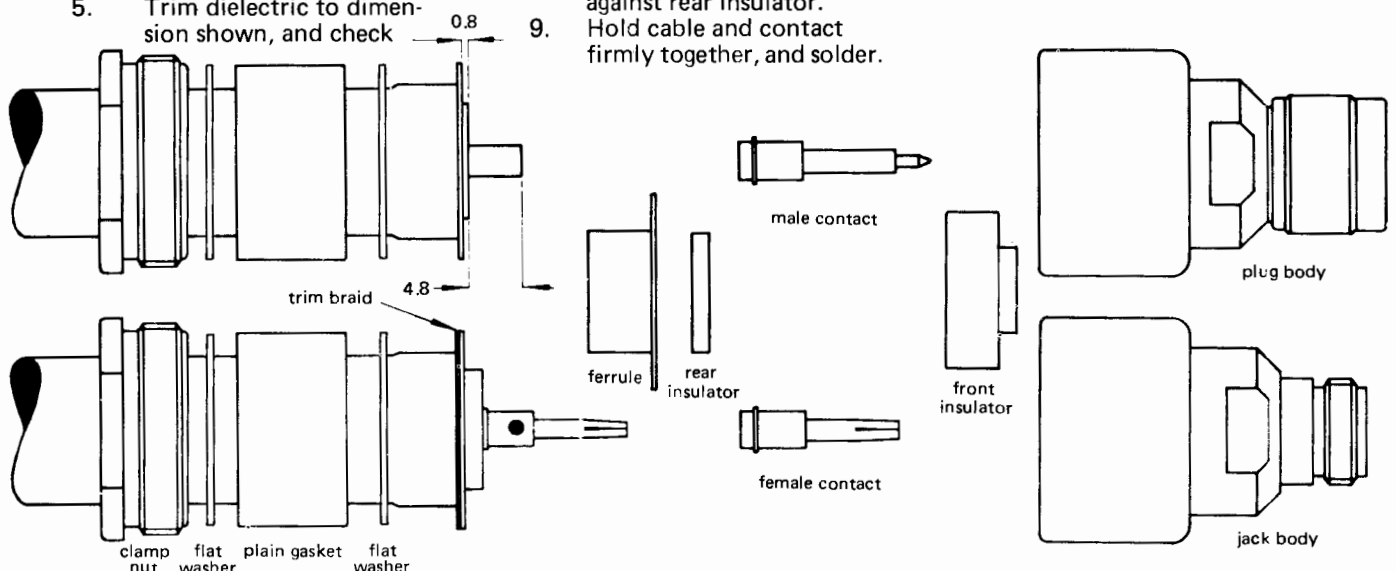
Pressure sleeve cable clamp, captive centre contact (for large cables)
